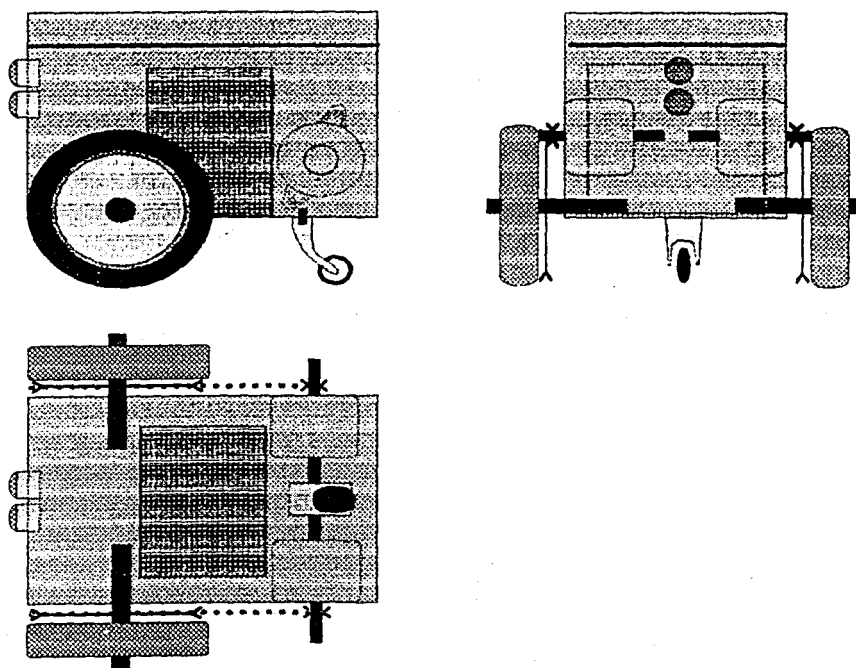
A sample robot drawing which has two DC motors on each side and a free running wheel at the back.
